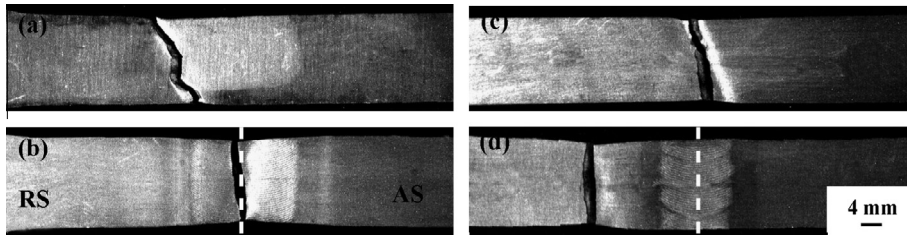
Top view of failed tensile specimens: (a) as-rolled sheet, (b) joint of as-rolled sheet, (c) as-annealed sheet and (d) joint of as-annealed sheet.
